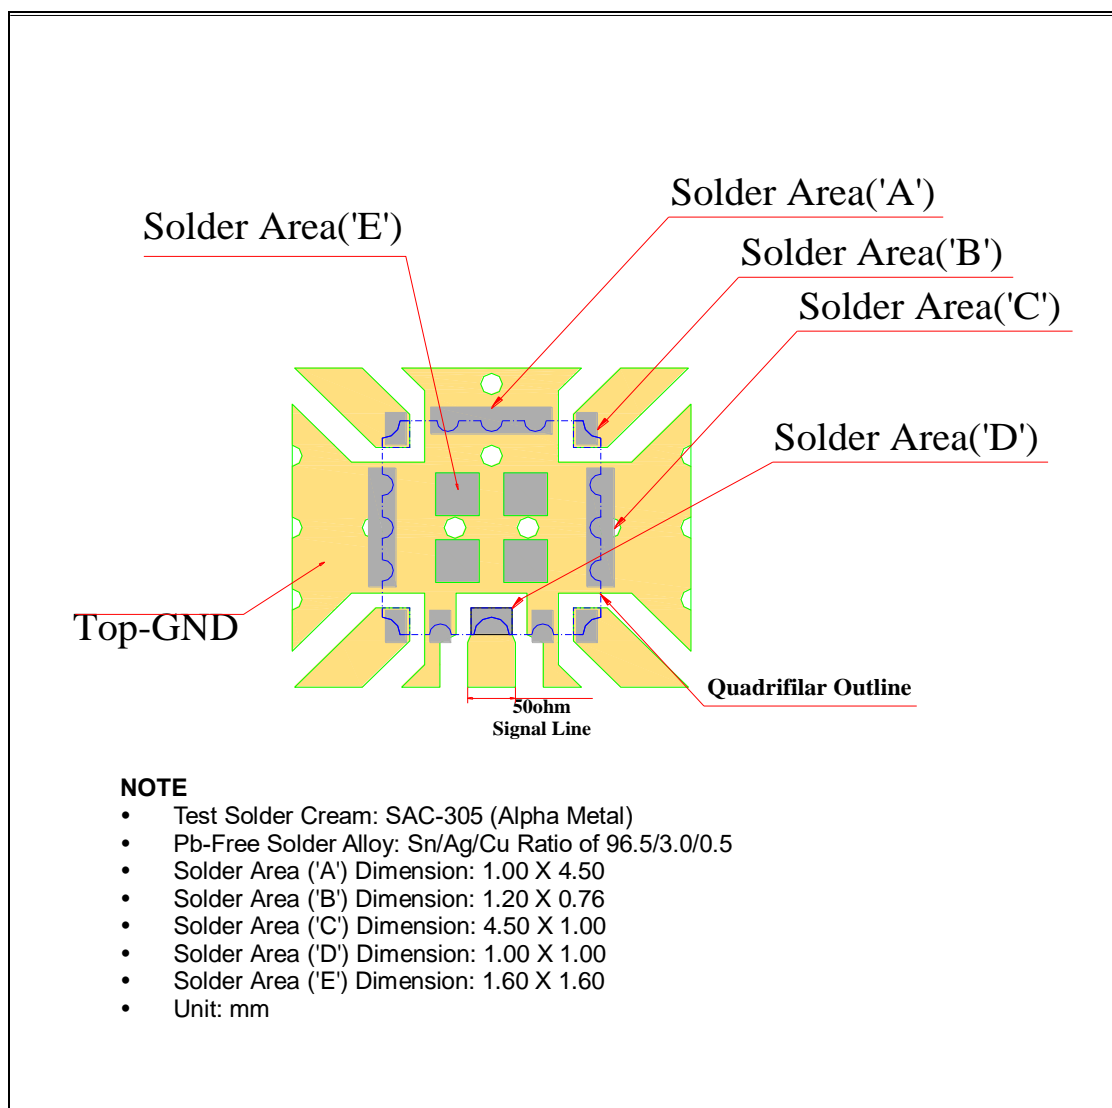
Recommended PCB Layout and Solder Mask Pattern
